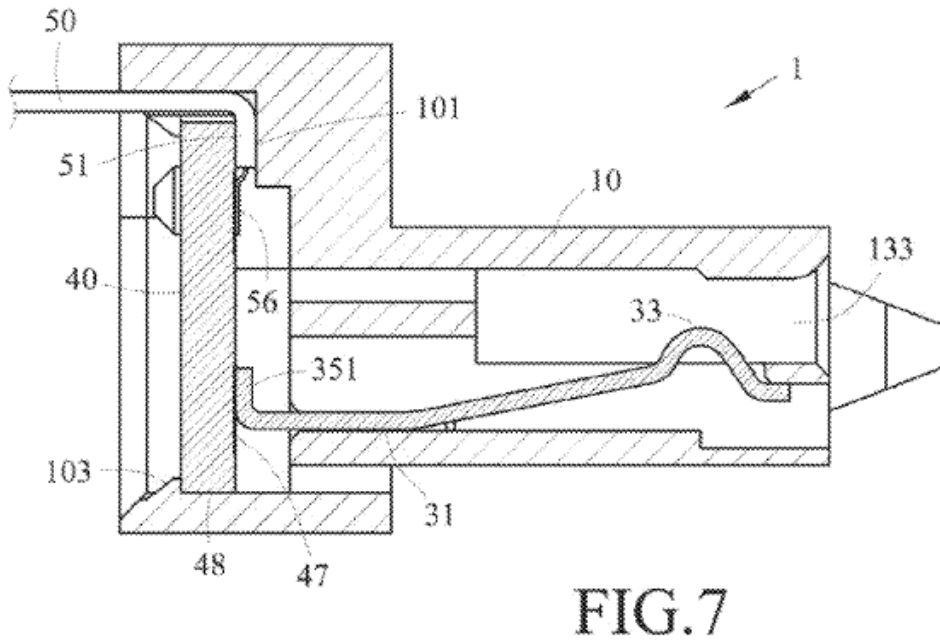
, above, shows the connector includes a design where the PCB includes two sides where a rear facing side faces away from the insulated housing 10. Ex. 1001, Fig. 7.
